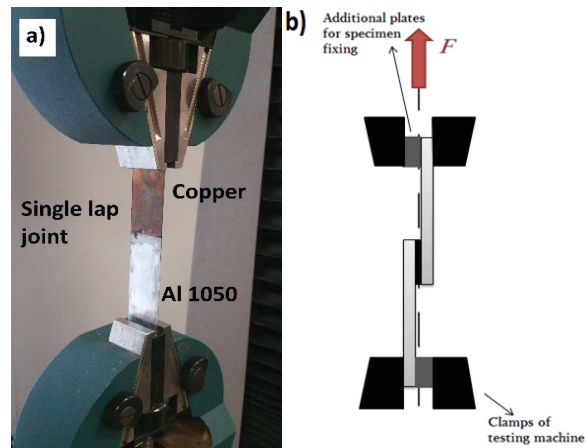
Al/Cu single lap joint; (a) Specimen in clamps of the testing machine; (b) Specimen with additional foils
